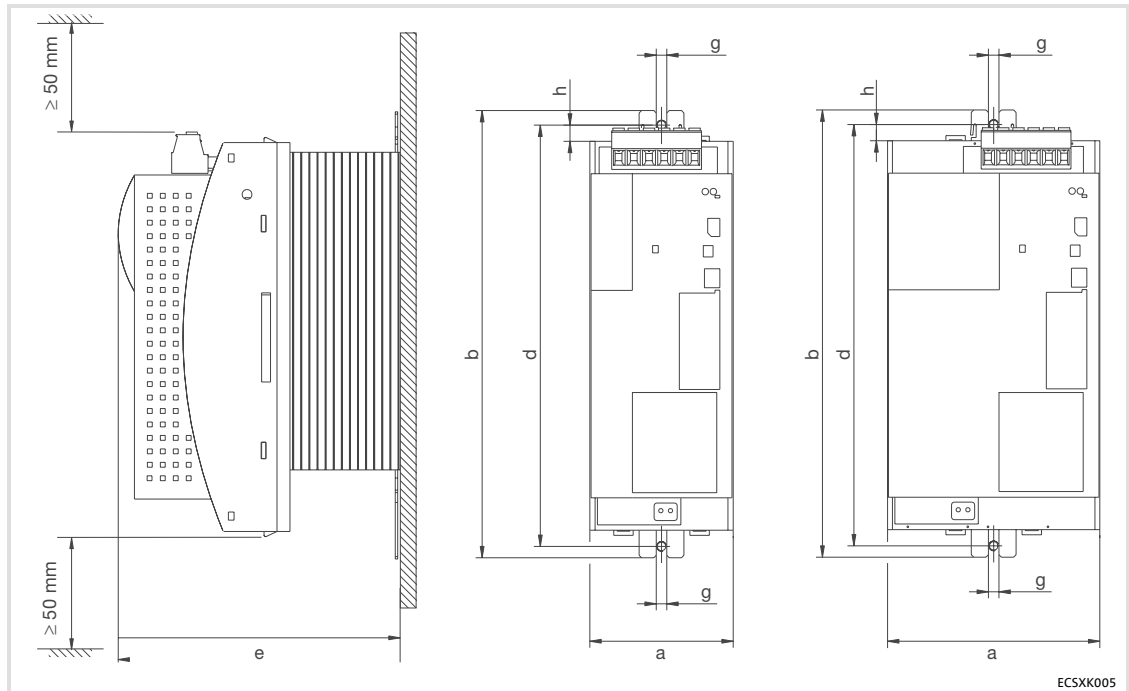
Dimensions for standard mounting with fixing rails, ECSEKxxx type
